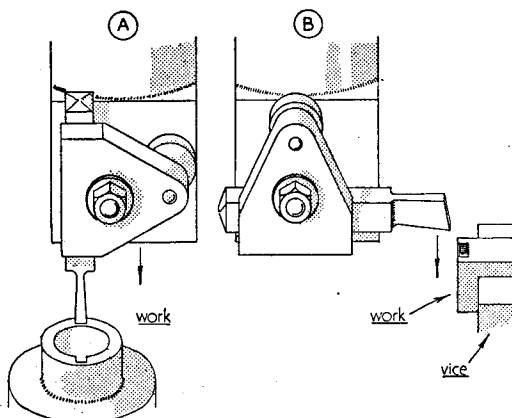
"A"—cutting a keyway in a pulley; "B"—the slotting tool set horizontally
